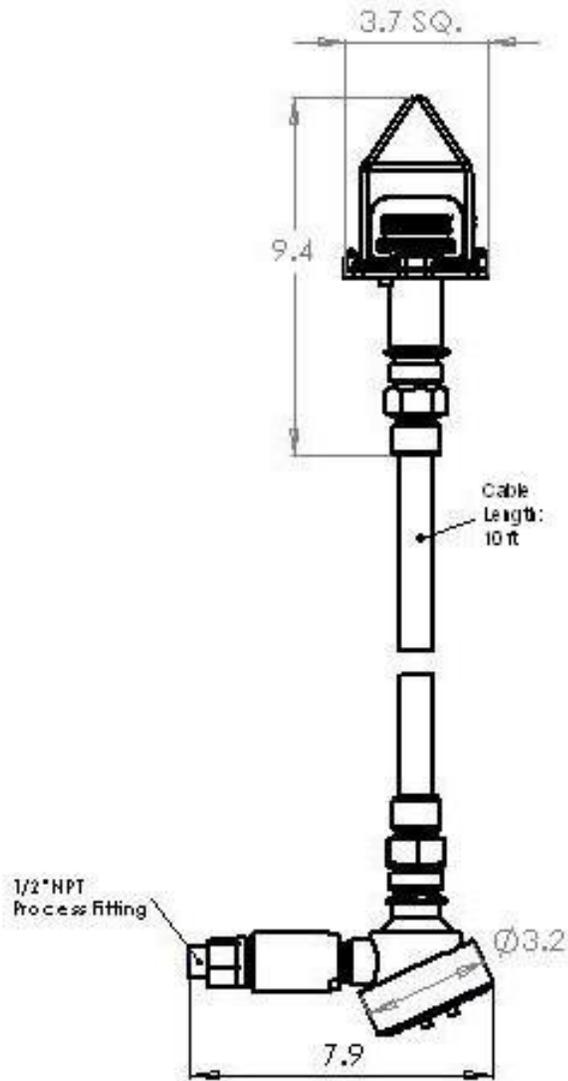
WI-GL-E-XX Dimensioned Mechanical Drawing
